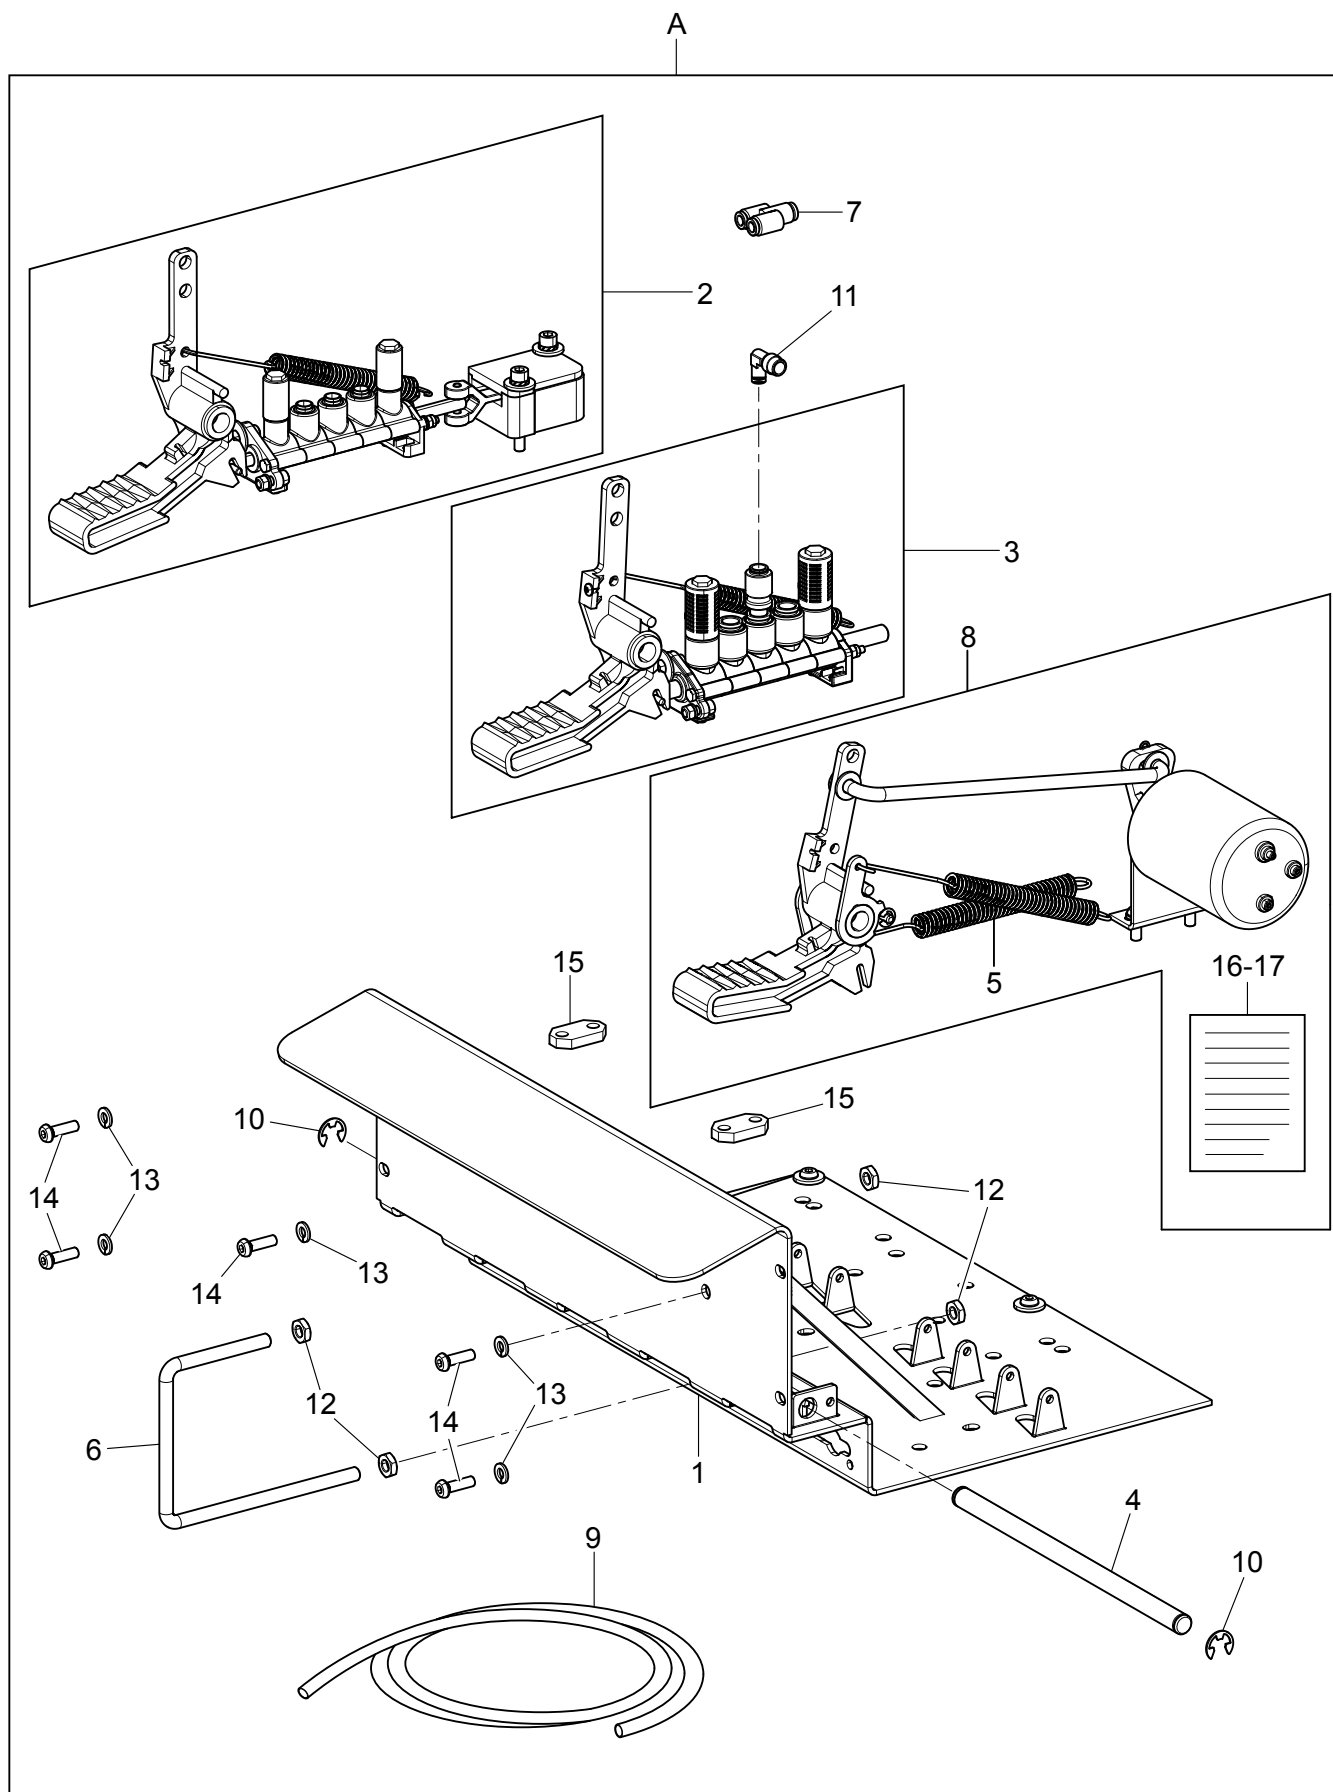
C - Rev. 3				VSG800A101			10479836
